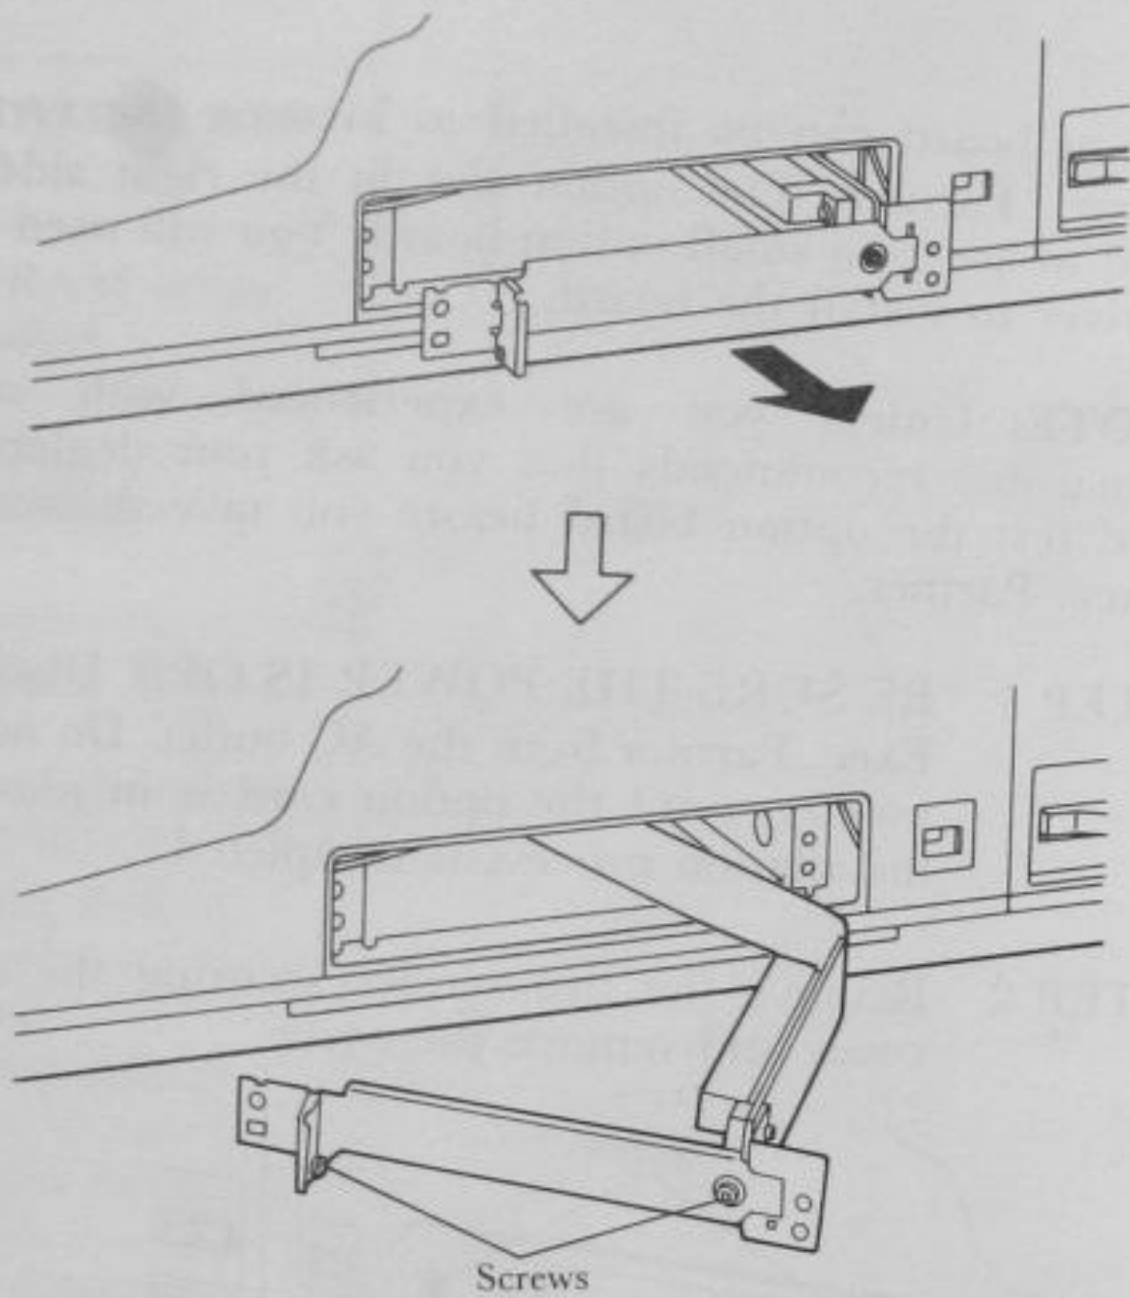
SLIDING OUT THE DUMMY COVER AND EDGE CONNECTOR
